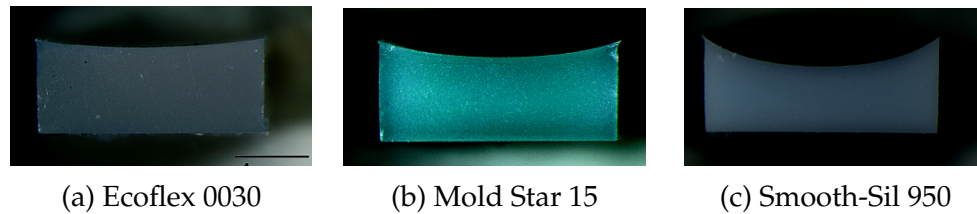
Cross-sectional view of the meniscus that forms when casting the various silicone dumbbell samples for tensile testing.
